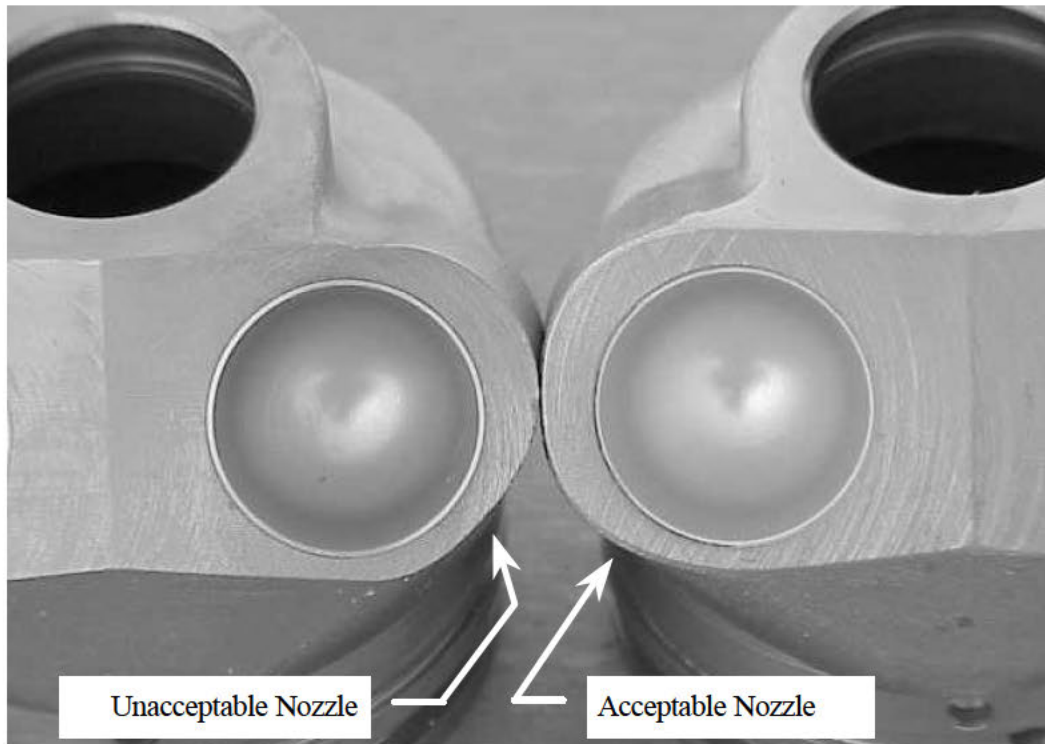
Acceptable and Unacceptable Nozzle Exhaust Port Shape.
